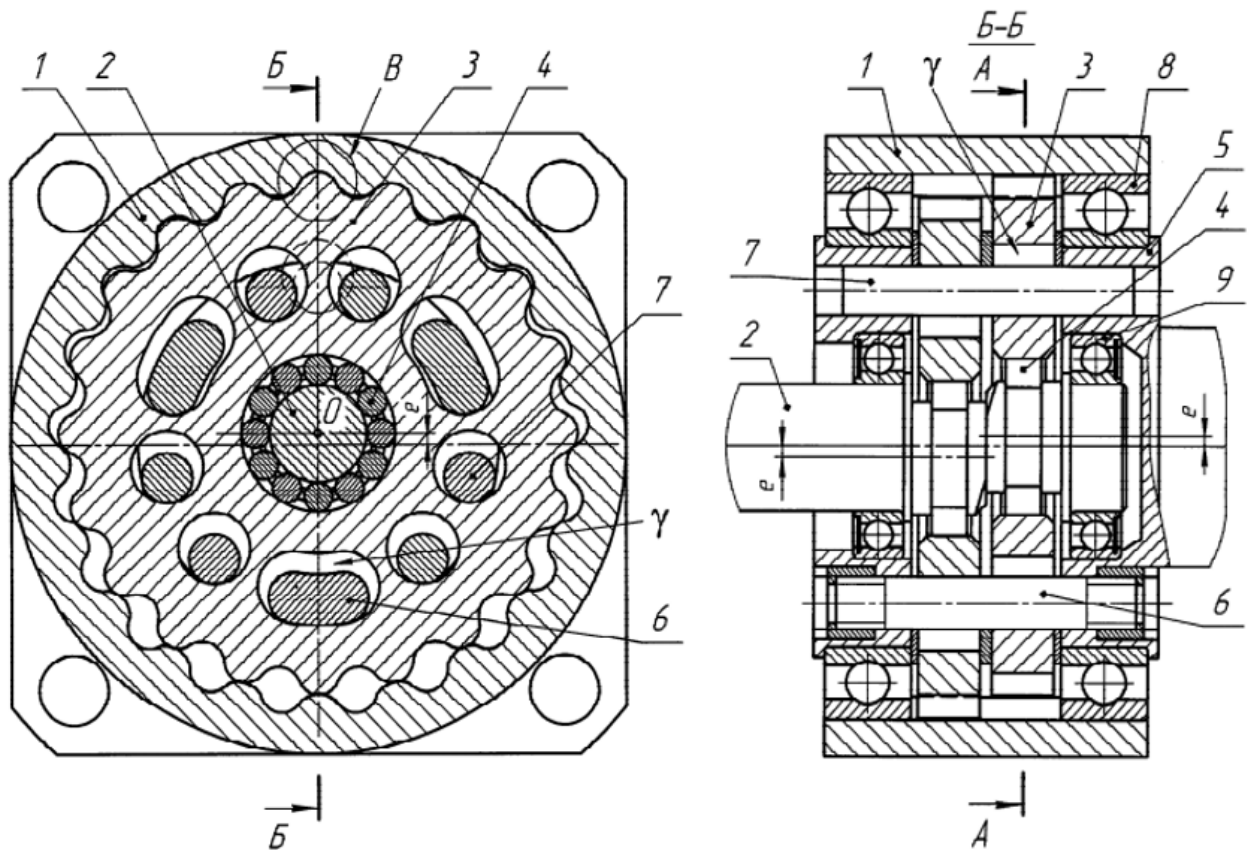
Scheme of a planetary gear with pseudo-pinion gearing.
